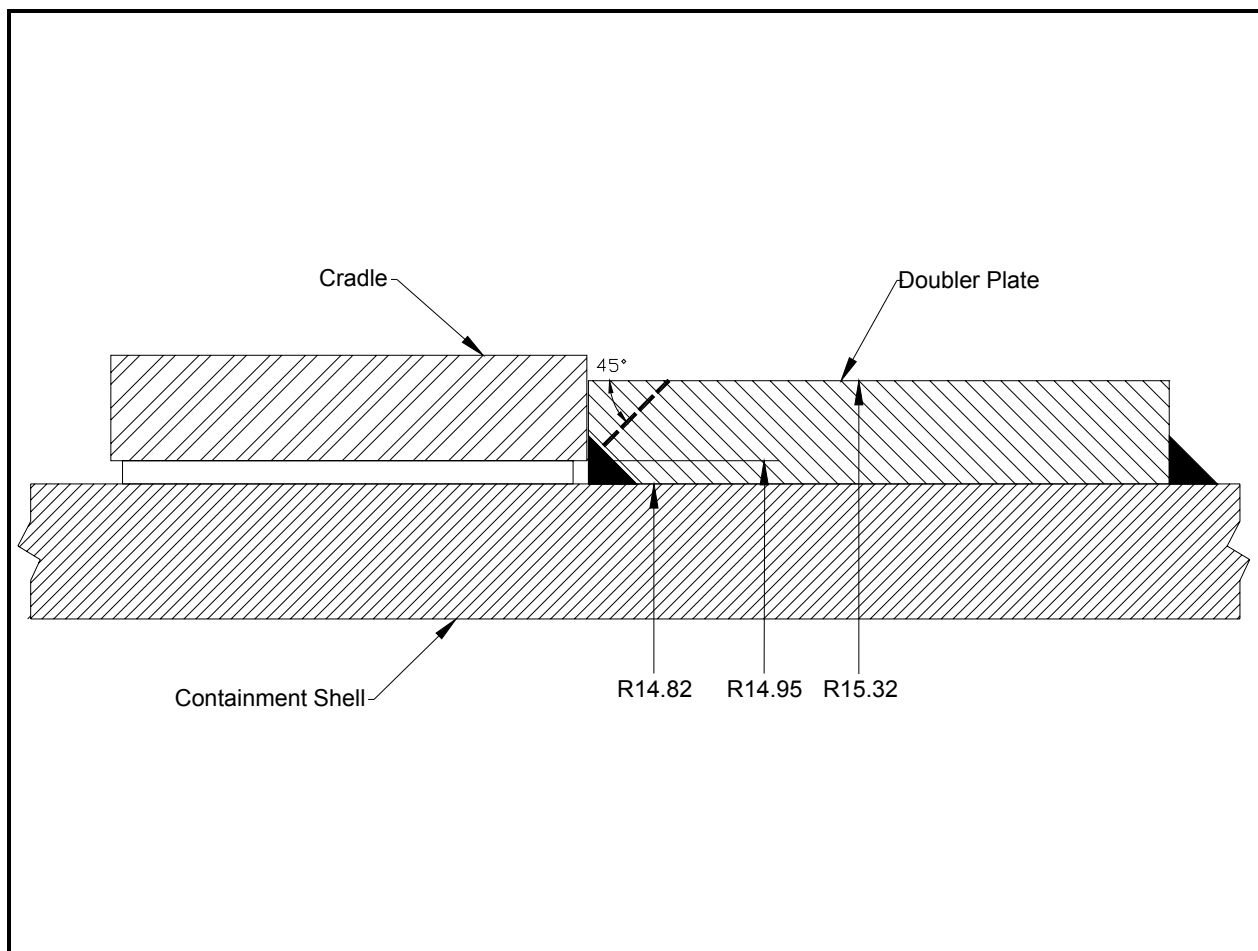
Skid Cradle and Doubler Plate Details
